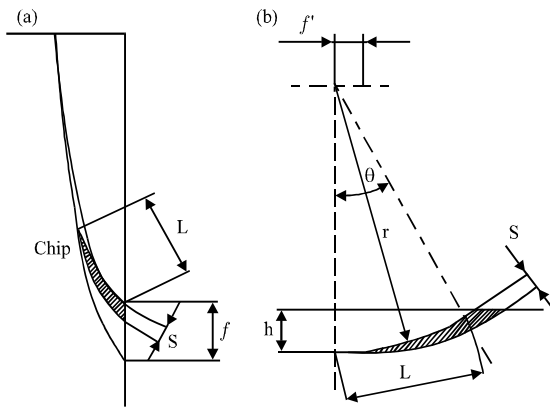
a) The size of chip in gear hobbing process and b) in fly-hobbing process
